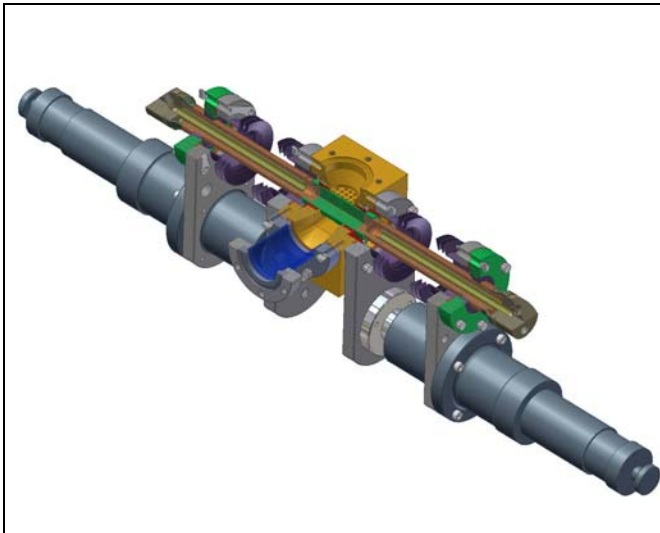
(top left) Sectional view of APS scraper assembly, round blades (closed).
